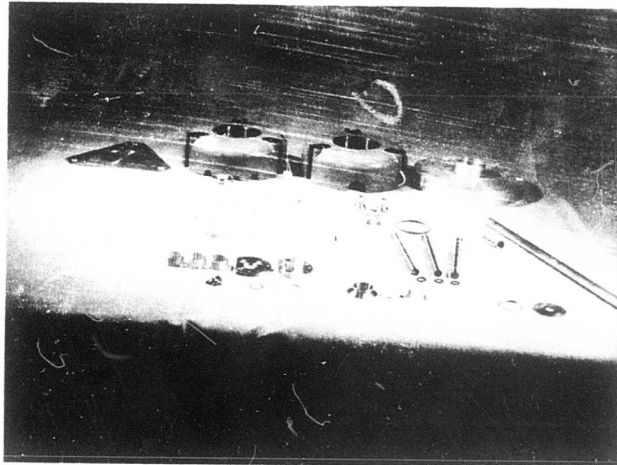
COMMON PARTS AND ASSEMBLIES OF THE QKA853 US
